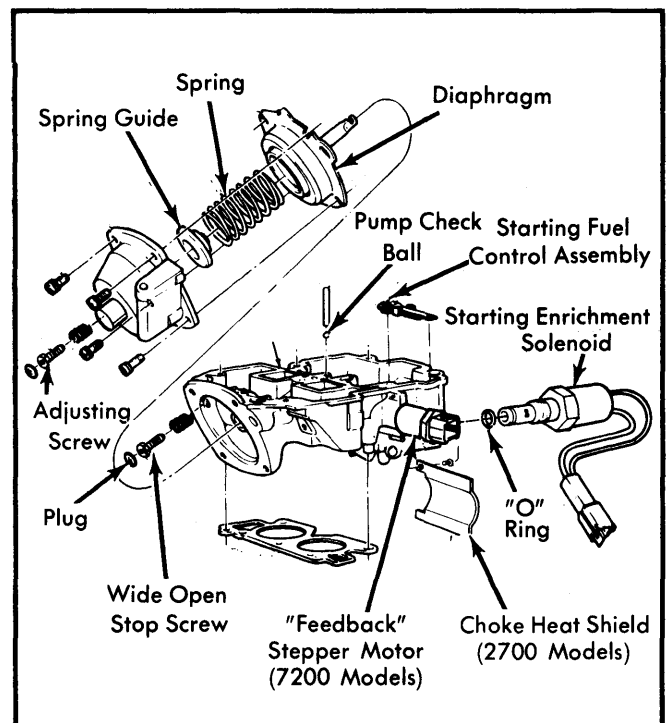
Exploded View of Model 2700 and 7200 Carburetor Main Body
